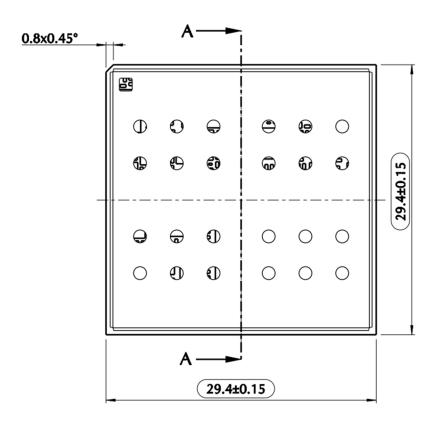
LE910Cx-WWX Mechanical Dimensions (Top view)
